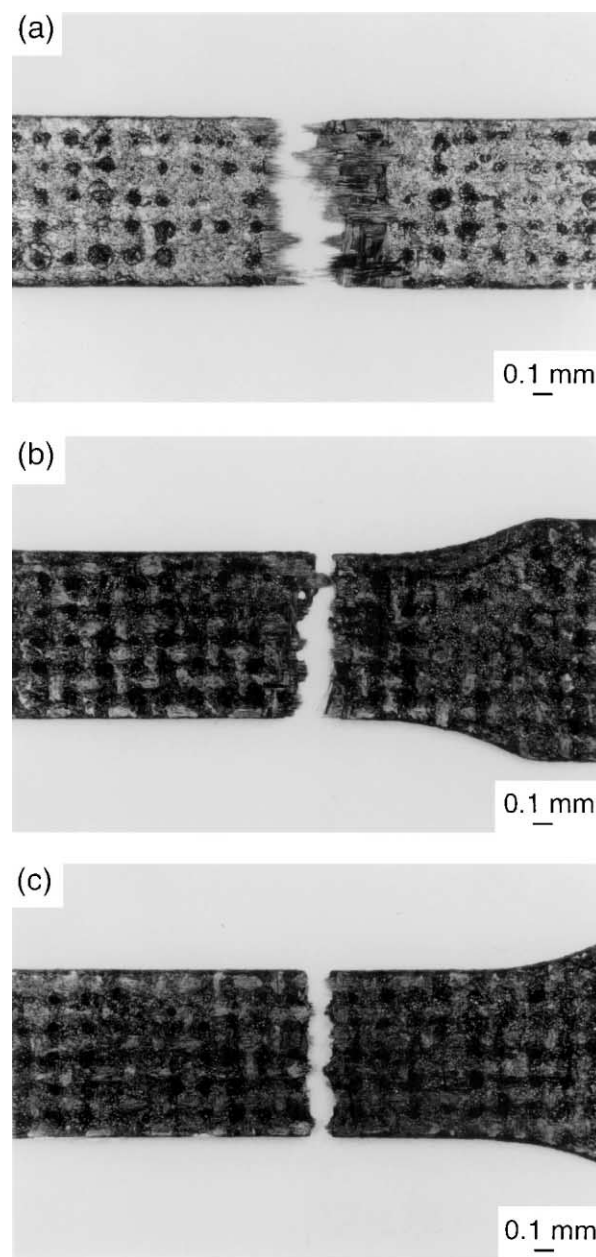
Macroscopic fracture appearance of the Hi-Nicalon/BN/SiC tested at (a) 298 K, (b) 1200 K and (c) 1400 K.
